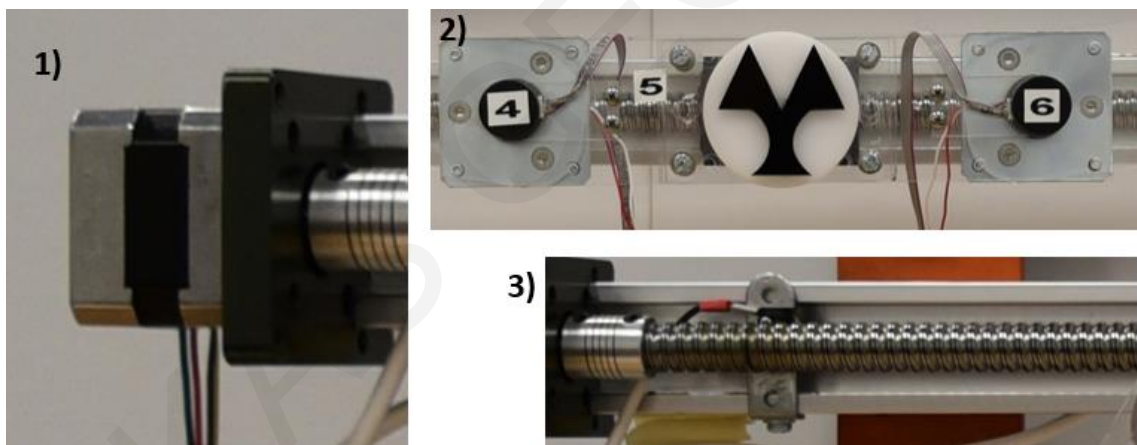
Mechanism components 1) Stepper motor, 2) Sliding block, 3) Ballscrew,
